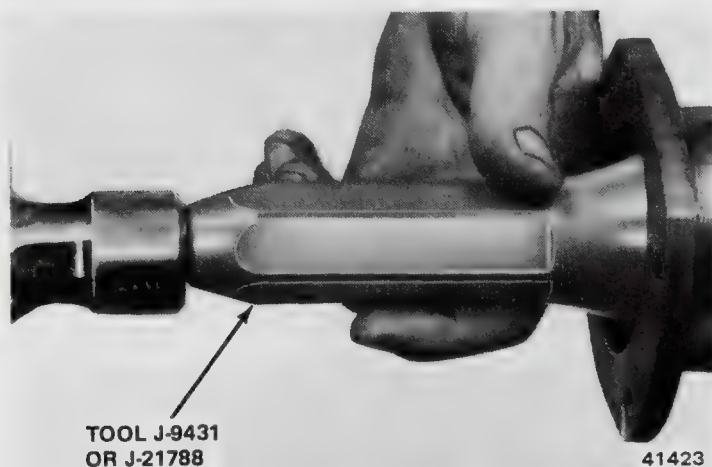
E-7 Axle Shaft Inner Oil Seal Installation
